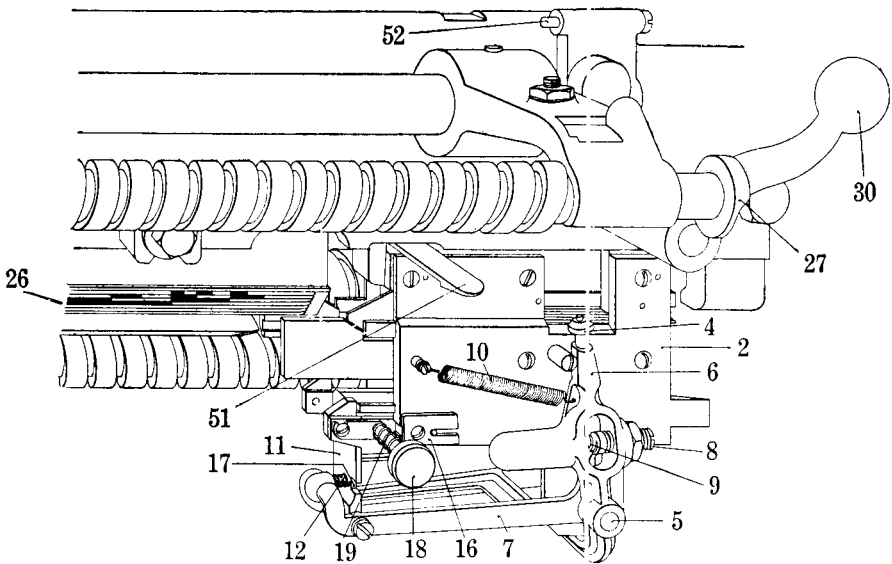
View showing the distributor box on a single-distributor Linotype machine. The back screw is shown lifted up away from the side of the distributor box, and the matrix lift cam 27 is not shown in contact with its cam roll 4. 2 is the distributor box back plate. The cam lever 6 and the matrix lift lever 7 act together as one lever, adjustable by the screw 8 and cushioned by the safety spring 10. The cam roll 4 is normally held against the cam 27 by the spring 10, and the lip on top of the matrix lift 11, extending above the lifting surface, is held by the spring 12 against the matrix about to be lifted.
